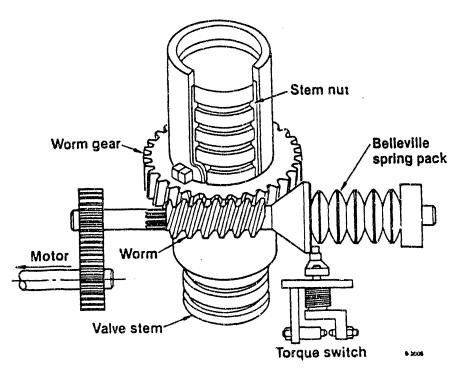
At the torque switch trip, the worm may either turn the worm gear and drive the disc deeper into the seat, or (if the disc will move not further) climb the worm gear, overcompressing the torque spring and producing additional thrust in the valve stem.
